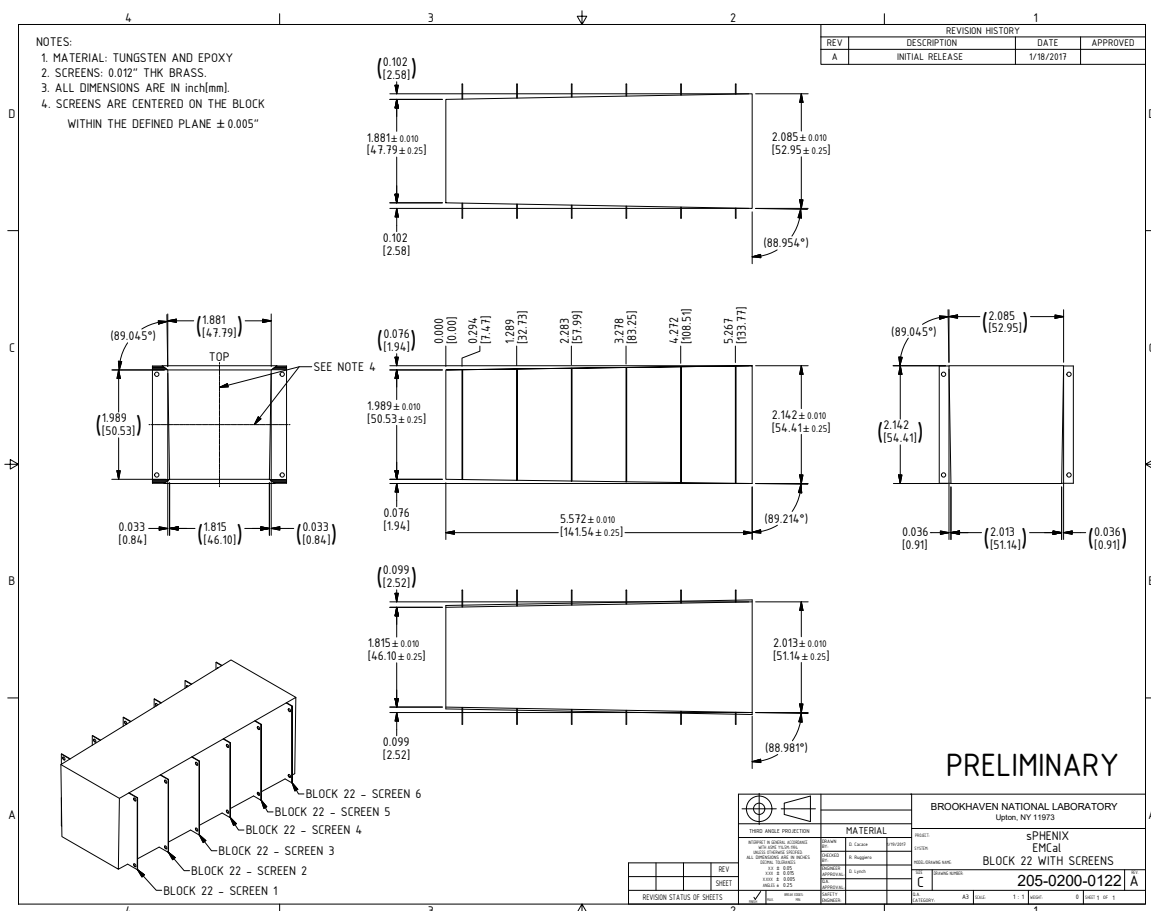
Technical drawing of a 2D projective block produced at UIUC.
